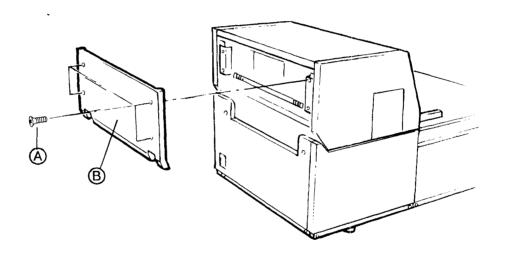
Removing Left Cover of IS520 Upper Unit
